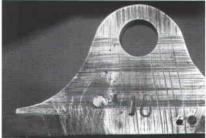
Blank 18 on the inside of winder-end spring bearing.
